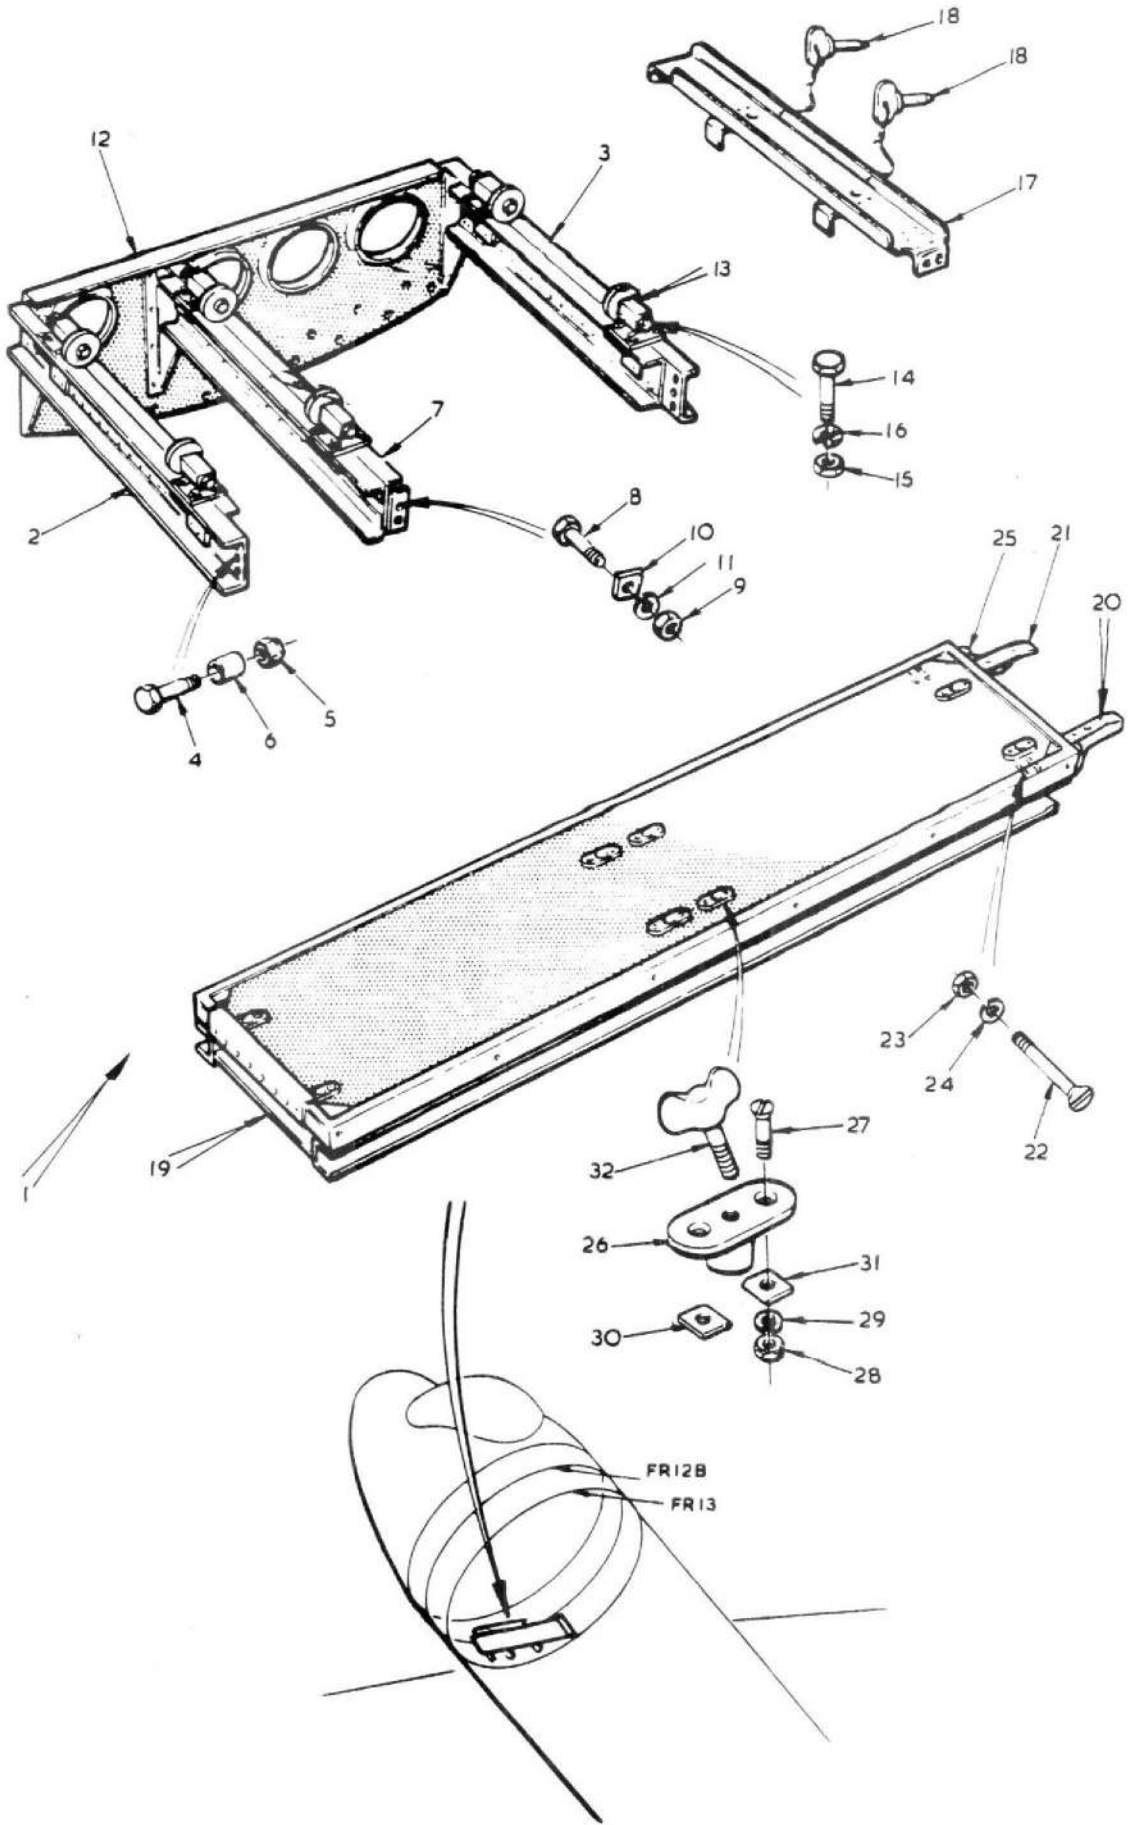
ELECTRICAL EQUIPMENT IN CENTRE SECTION
